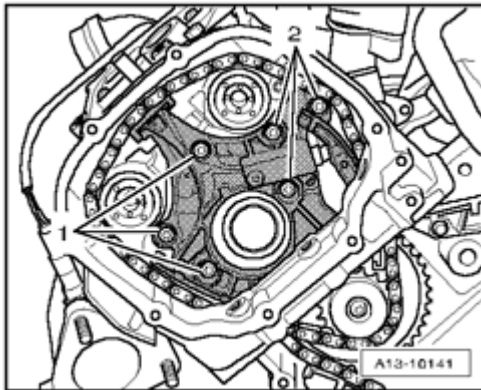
Removing Bolts, Left Chain Tensioner And Left Camshaft Timing Chain
